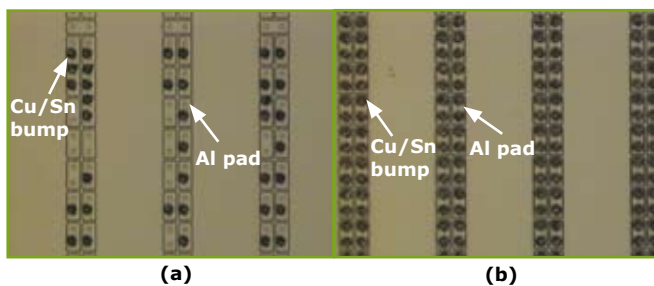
(a) Fabrication results of Cu/Sn solder micro bumps with Ti used as seed layer and etched away with wet etching, lots of solder micro bump missed after fabrication; (b) Fabrication results of CuSn solder micro bumps with Ta used as seed layer and etched with dry etch process.
